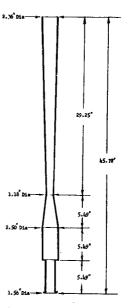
SKETCH SHOWING DIMENSIONS OF HS-1(.024) COMBUTTOR
